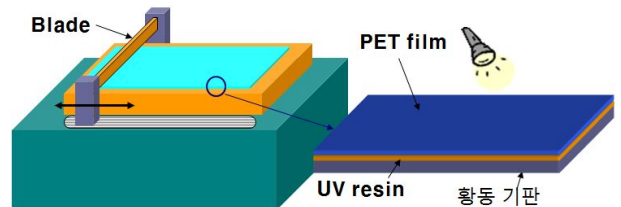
Schematic of planar coating machine and film/pattern master sample for measuring releasing force
